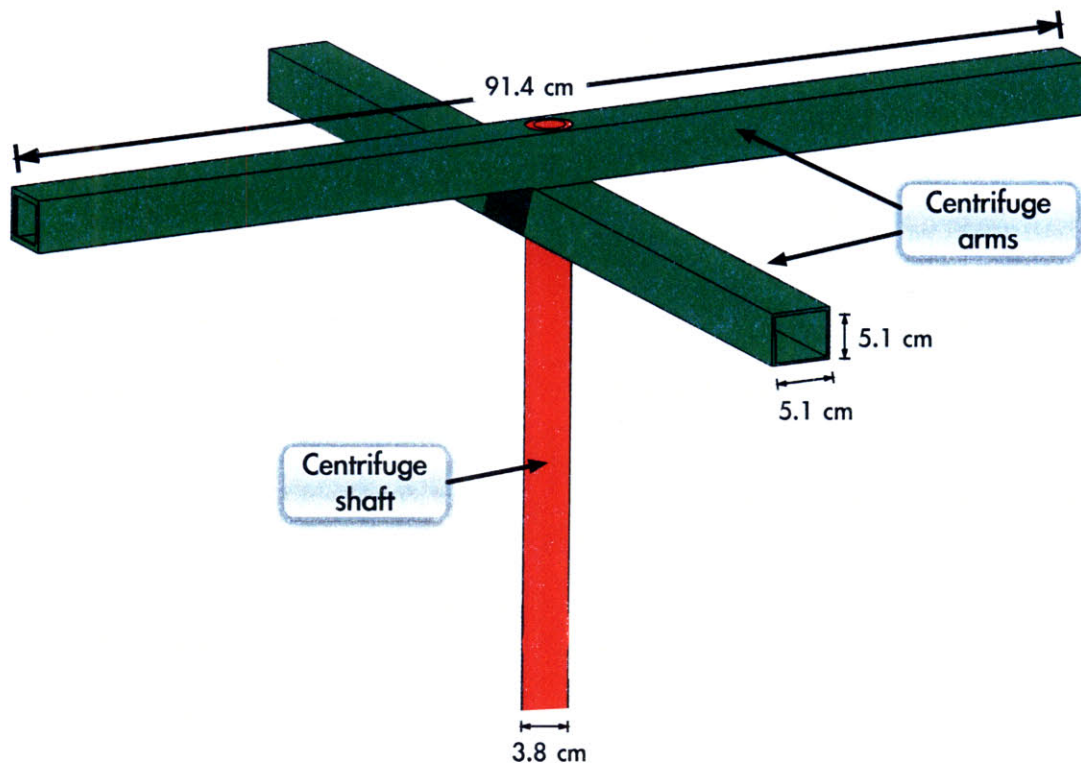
Upper part of the IGTA centrifuge (CAD: Kendra Toole)
